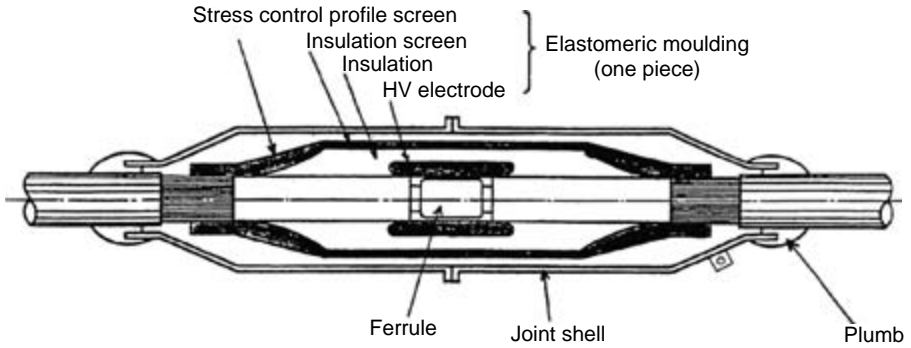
Example of dry-type pre-moulded joint [24] [reproduced by permission of CIGRE]
